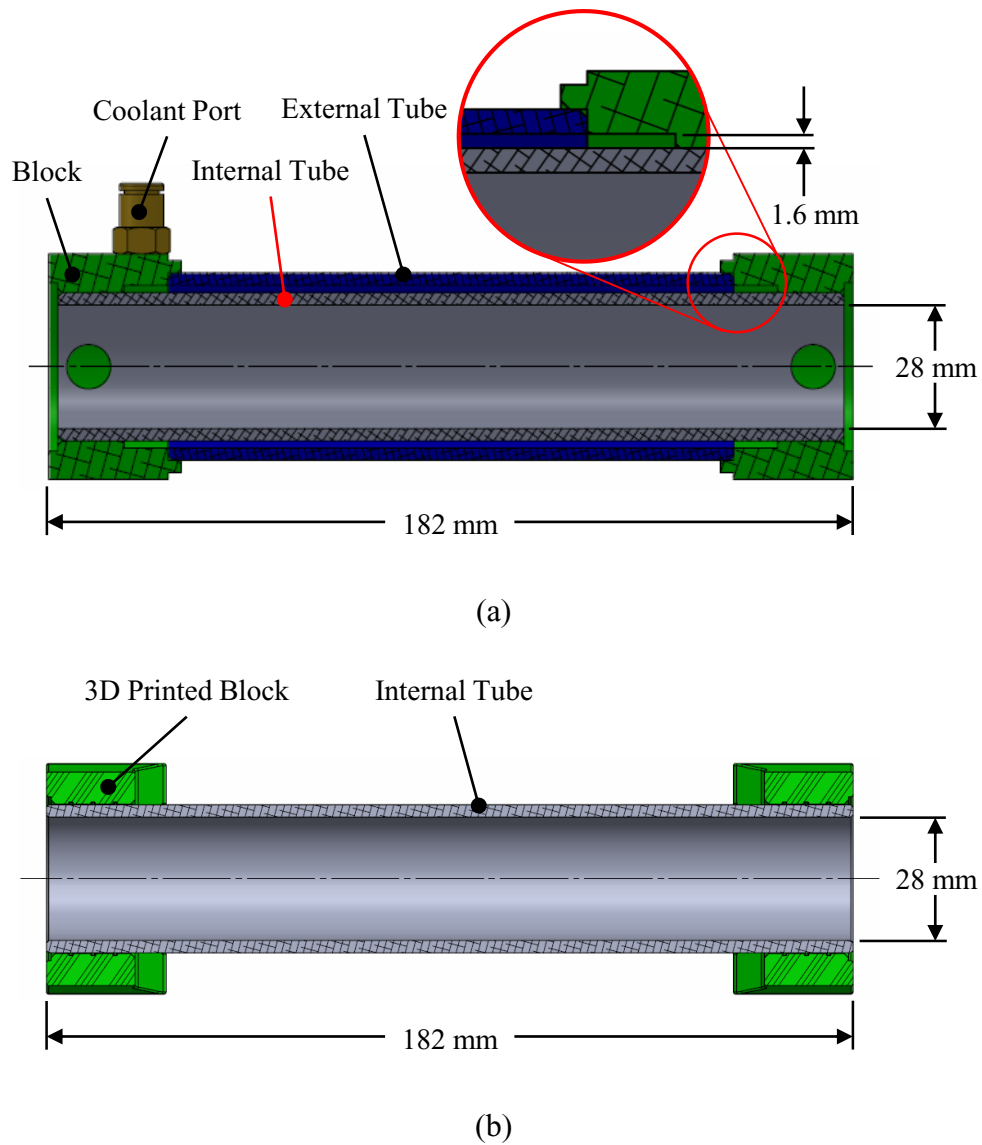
Section views of the original [79] (a) and modified (b) connecting pipe.
